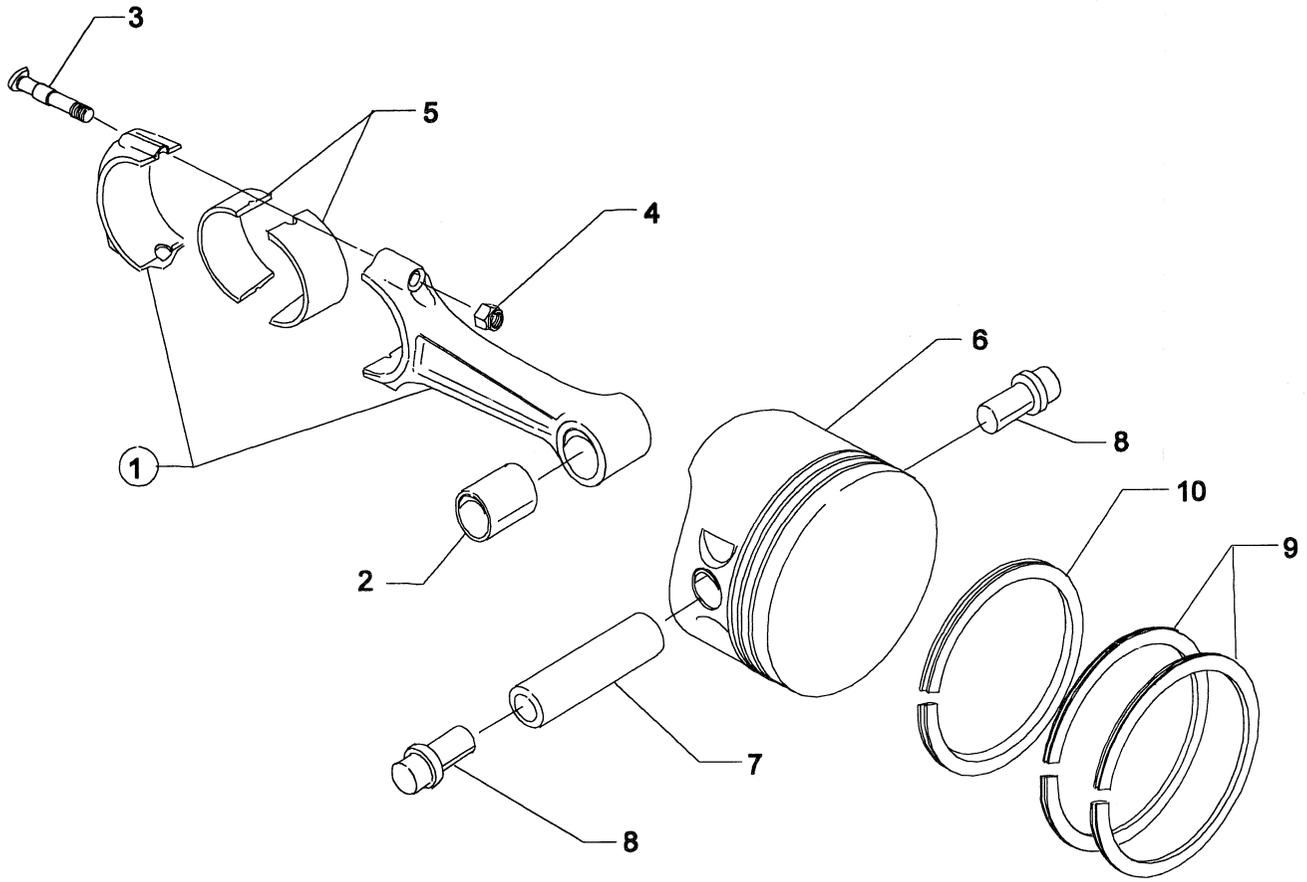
CONNECTING RODS, PISTONS AND RING ASSEMBLIES
